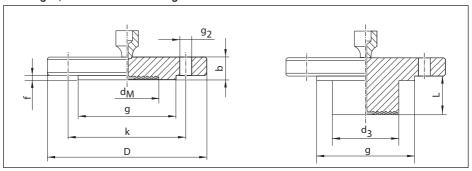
Process fitting VEGADIF 85 with single-sided chemical seal, plus side EN flange with and without extension, 316L
